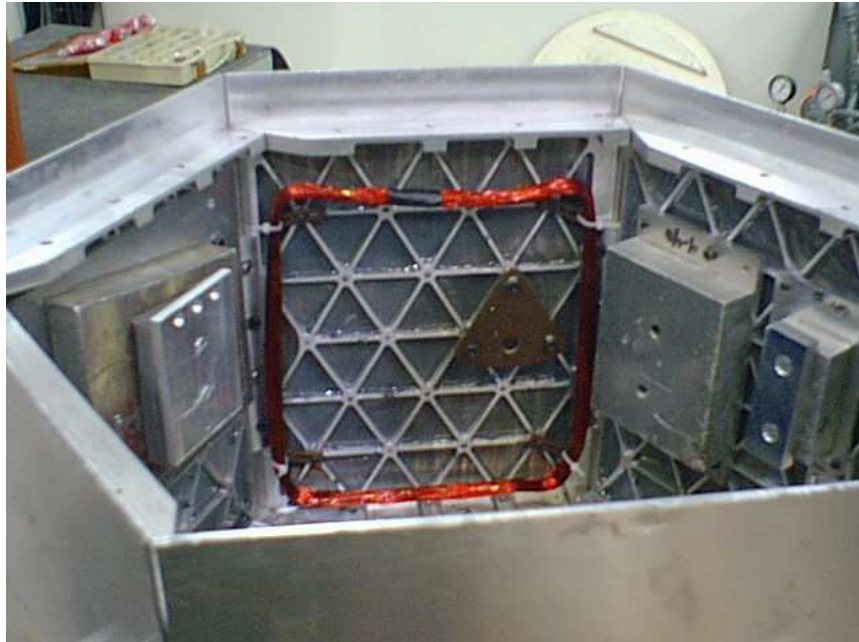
Prototype Torque Coil Damaged During Thrust Sine Burst Test
